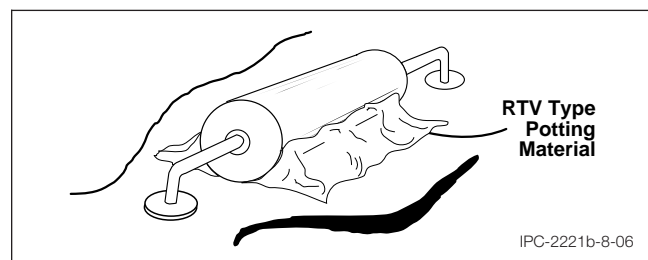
Adhesive-Bonded Axial-Leaded Component
